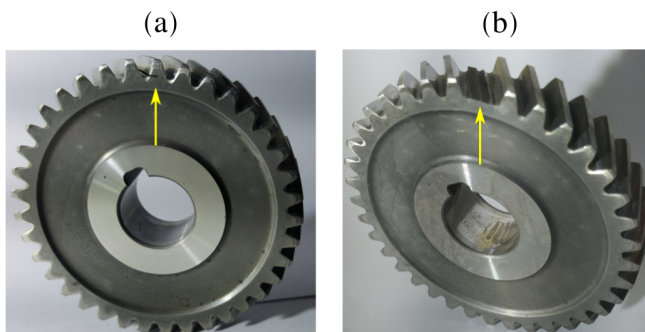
The gear used in the Localised Gear Damage (LGD) investigation is presented. (a) The gear before the experiment started; (b) The gear after the experiment was completed.
